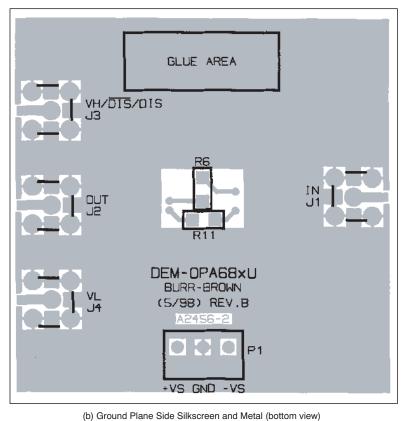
DEM-OPA-SO-1A Demonstration Board Layout
